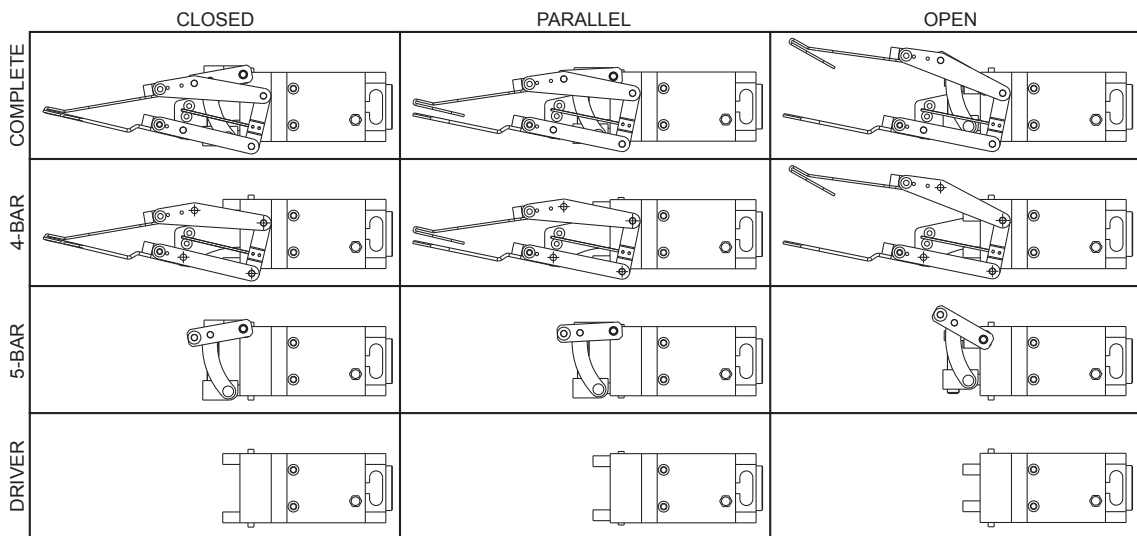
From bottom to top, side views of: driver; driver with the 5-bar assembled; driver with the 4-bar (5-bar not shown); complete gripper (driver, 5-bar, 4-bar). The mounting plates are removed to see the mechanisms. The 4-bar is in neutral configuration; the 5-bar is in open, parallel and closed configuration
